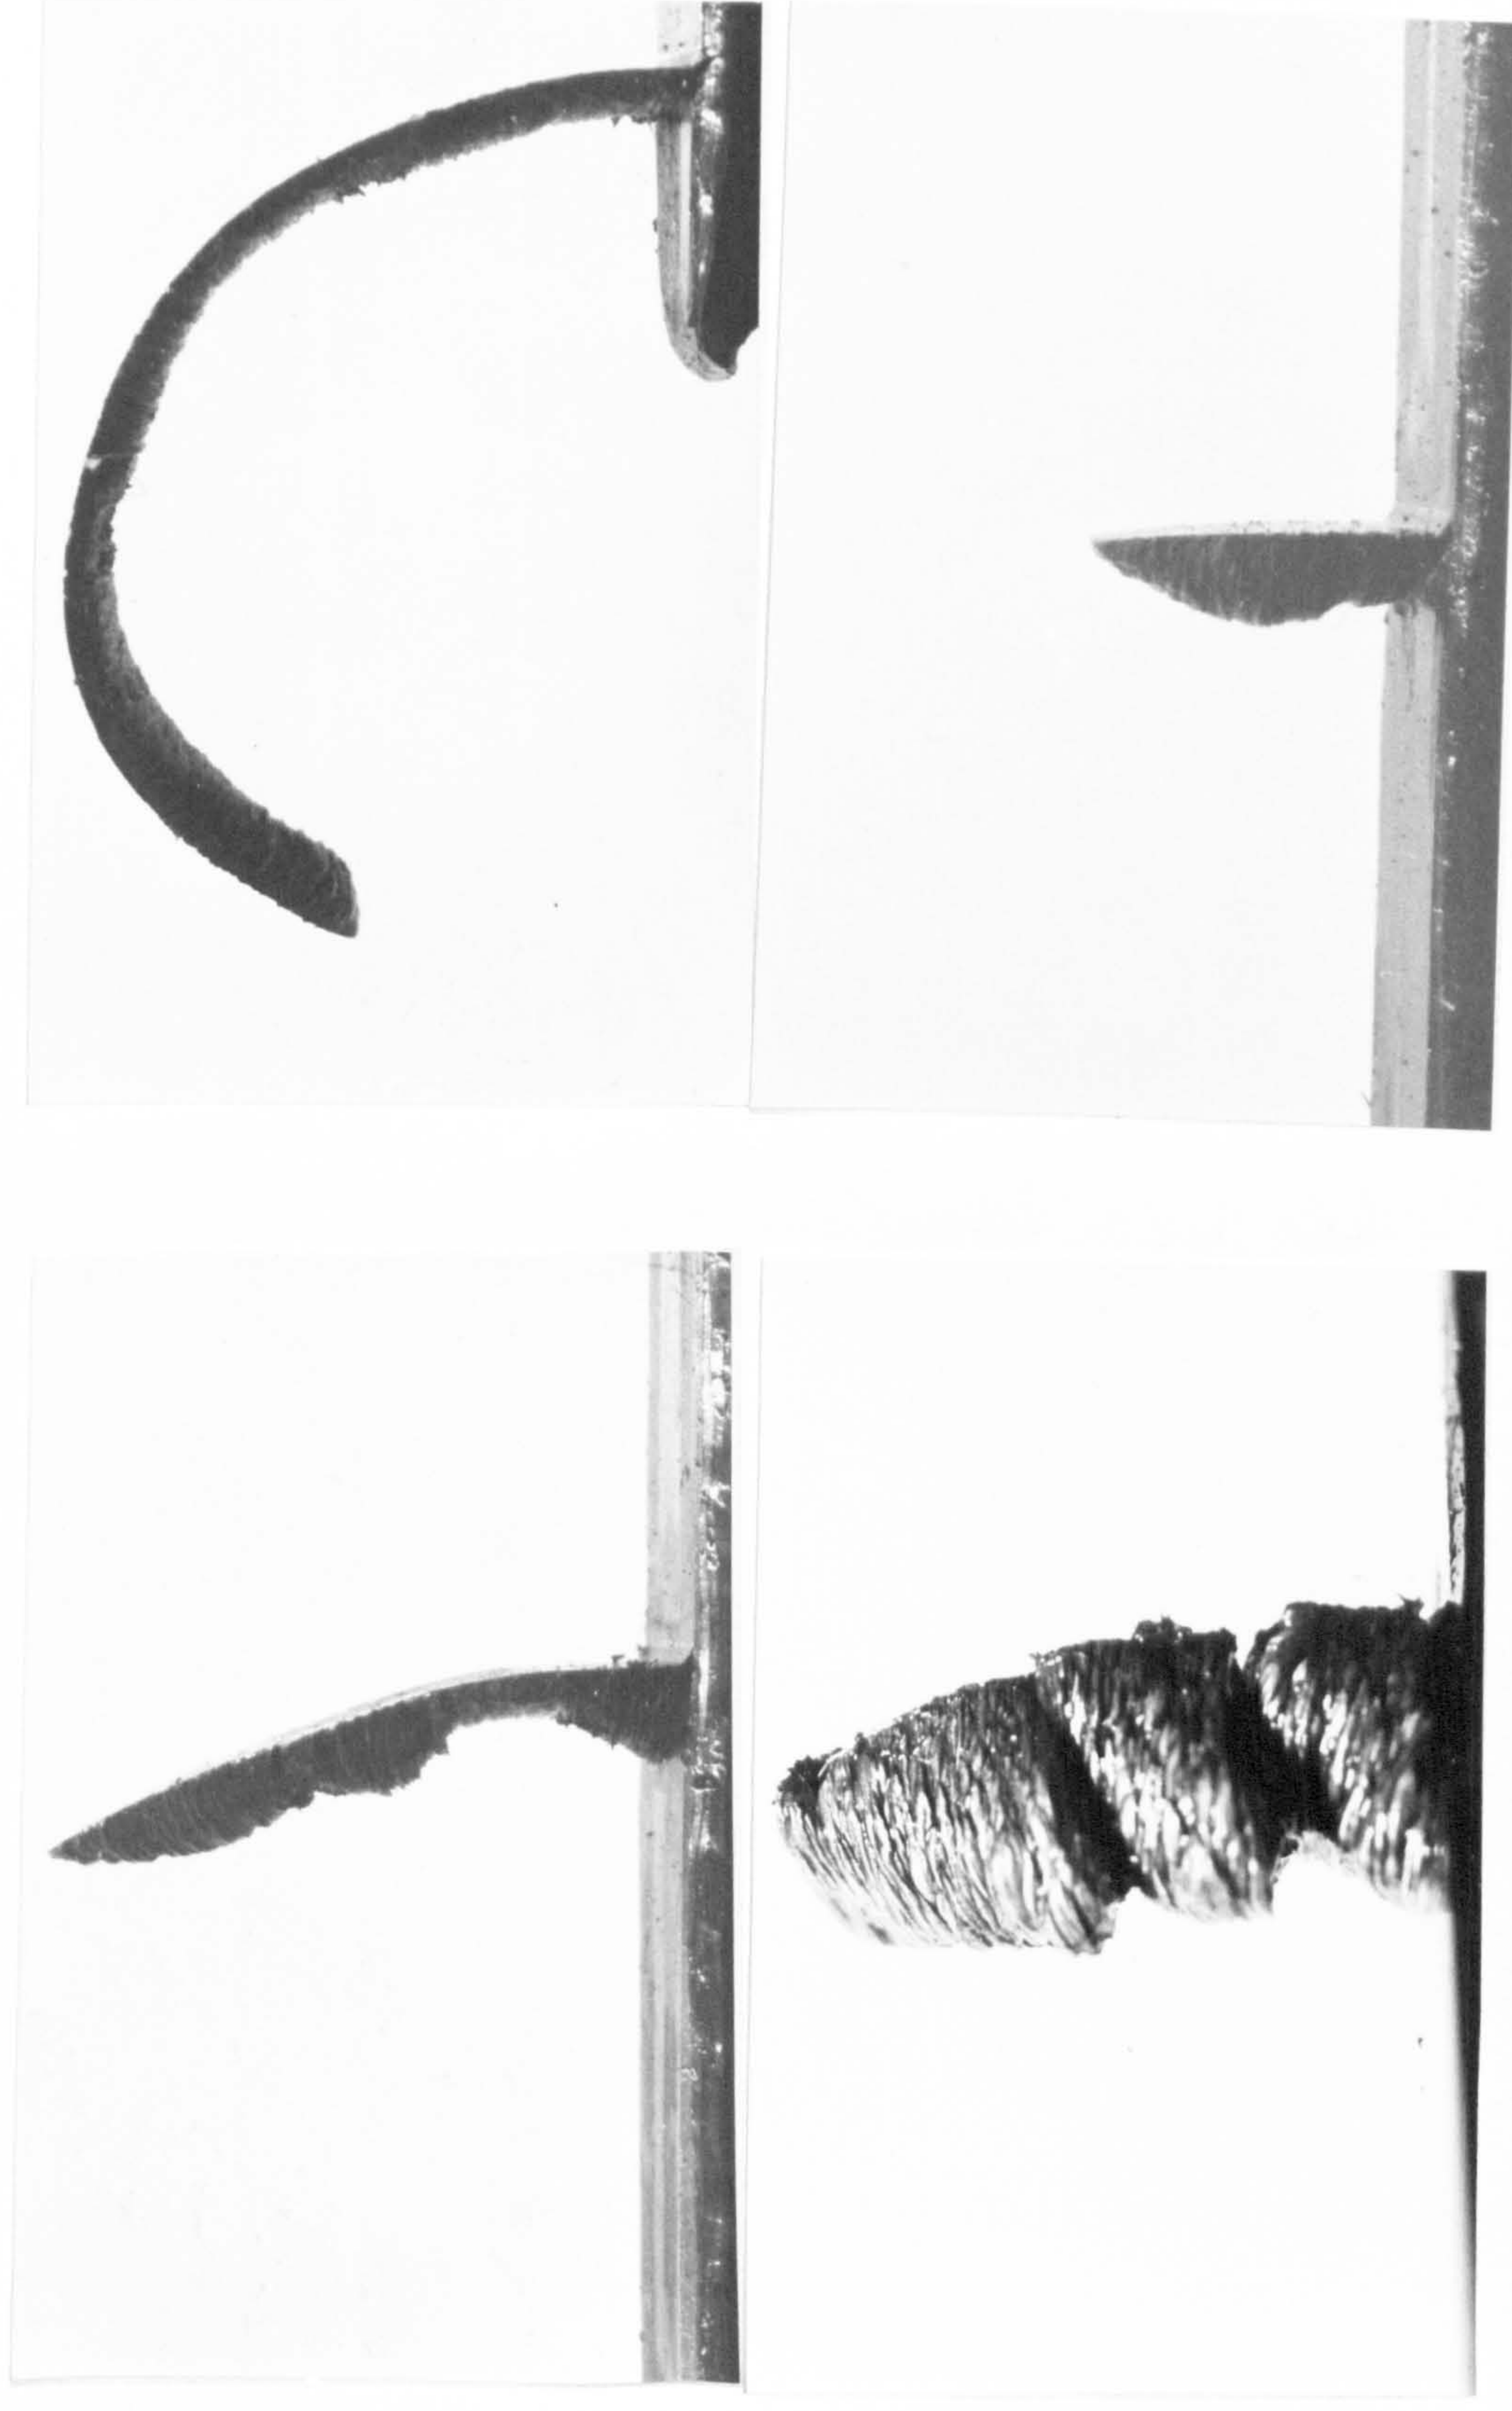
CHIPS OF VARYING GEOMETRY PRODUCED WHEN MACHINING COPPER WITH A BLUNT TOOL
